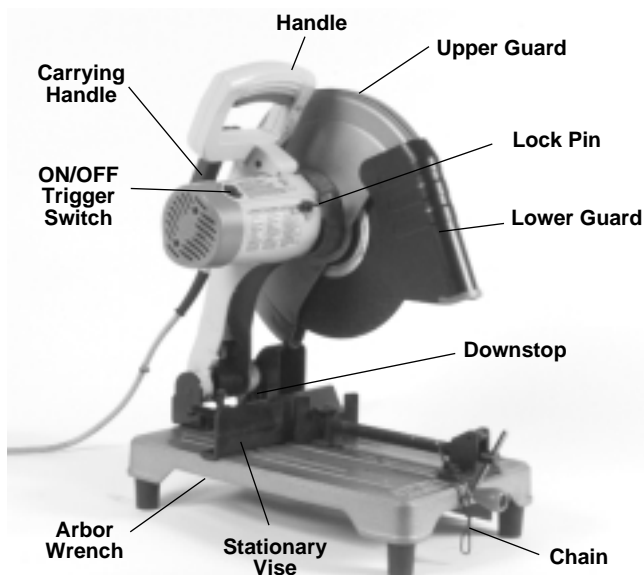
CM1450 14" Abrasive Cut-Off Machine
